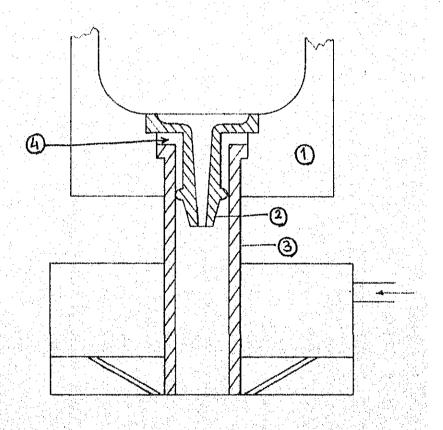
NOZZLE ATOMIZER ASSEMBLY
